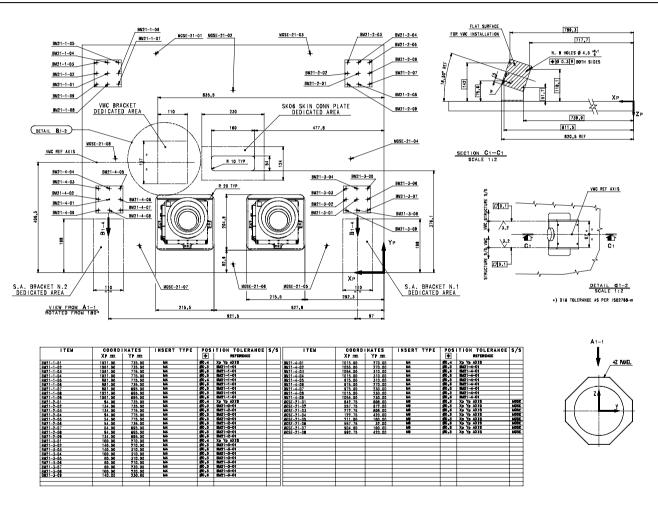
Planck +Z Lateral Panel.(outside of the SVM).
